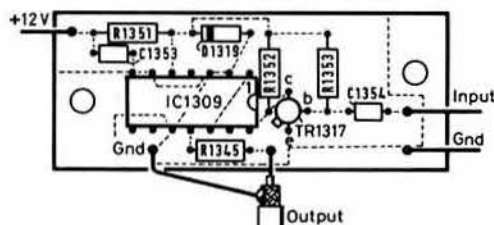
VFO divider board. PCB track layout, single-sided, and components layout
